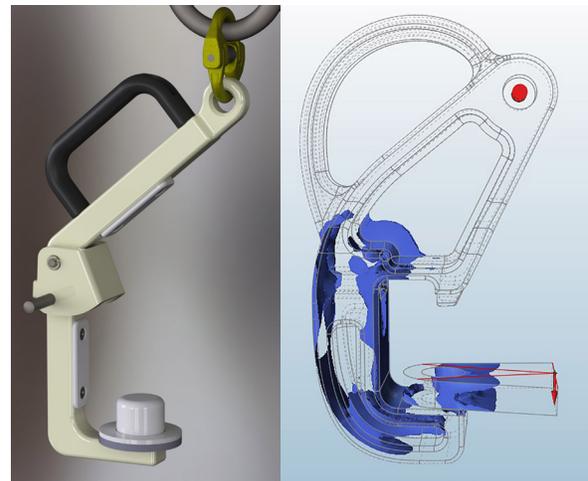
Part assembly consolidation resulted in a 96% reduction of tooling assembly components.
